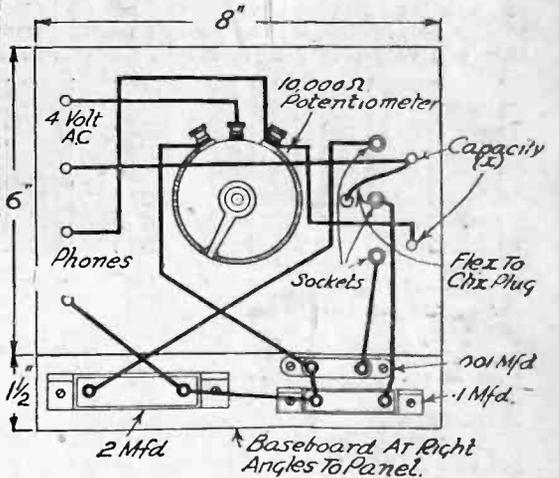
Sketch plan of lay-out and wiring diagram.
